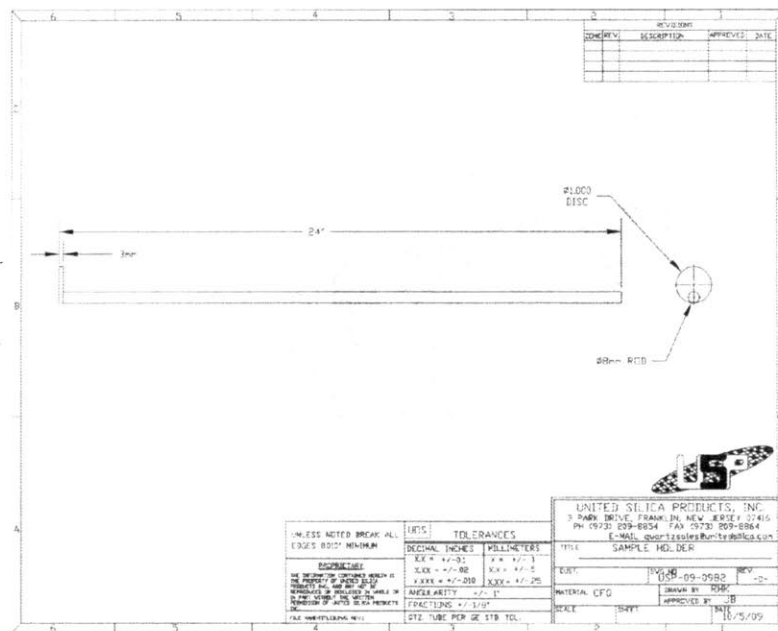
Part drawing for the sample holder used for high-temperature quenching.
